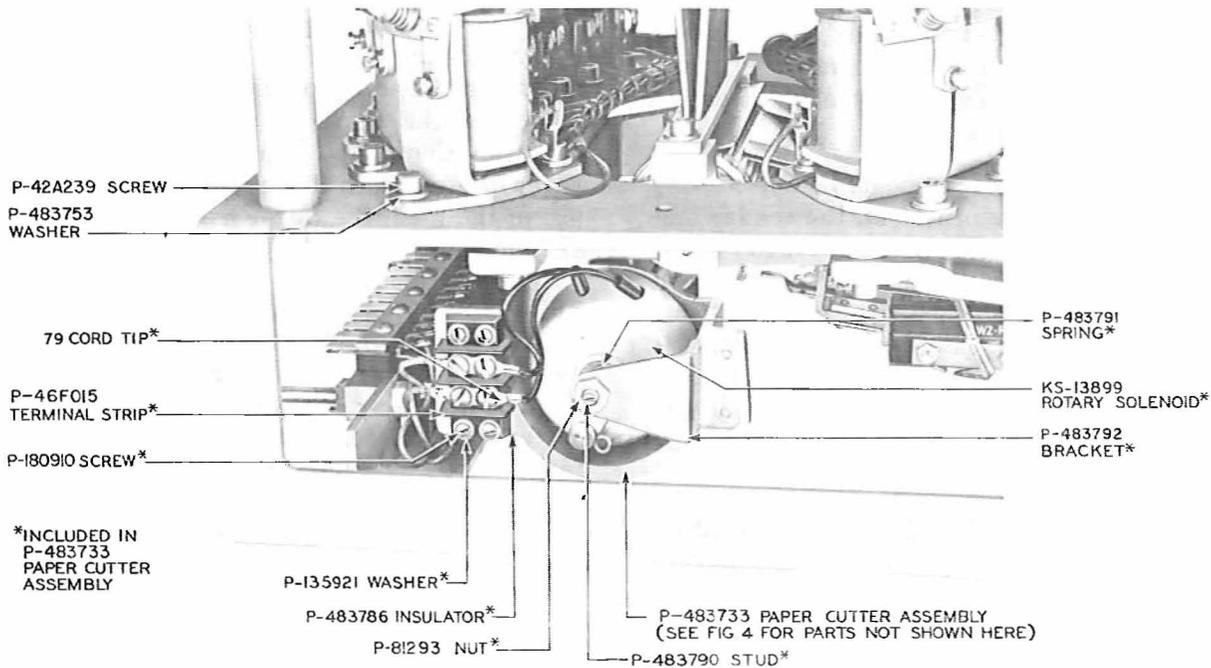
KS-13882 L1 and L3 Perforators — Side View — Paper Cutter Side
